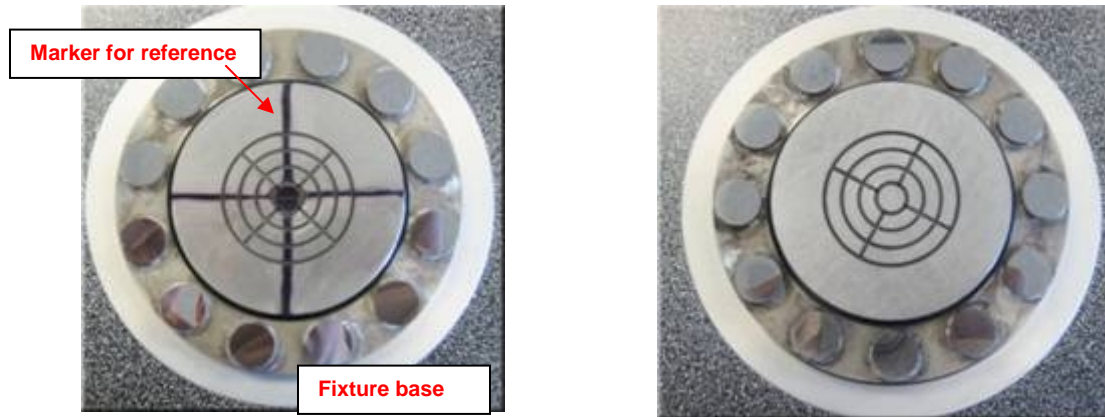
Image of the Model 147D with various parts of the fixture labeled.
